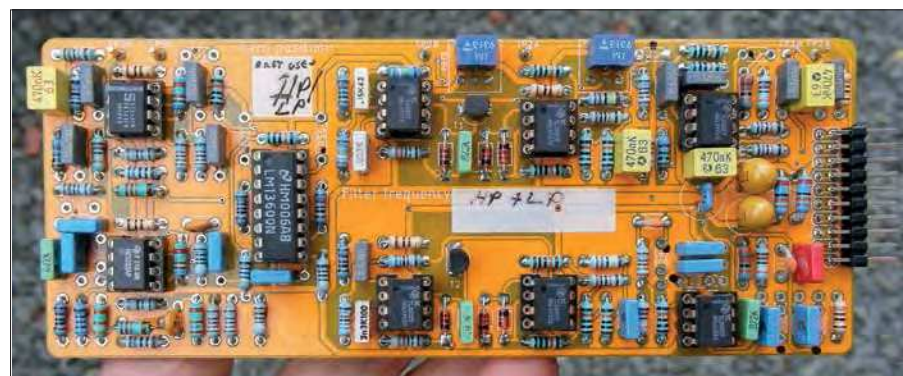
Completed HP/LP board. Note this was an earlier version with a few extra component positions for experimental purposes. All the boards supplied by PE will exactly conform to the overlays.
